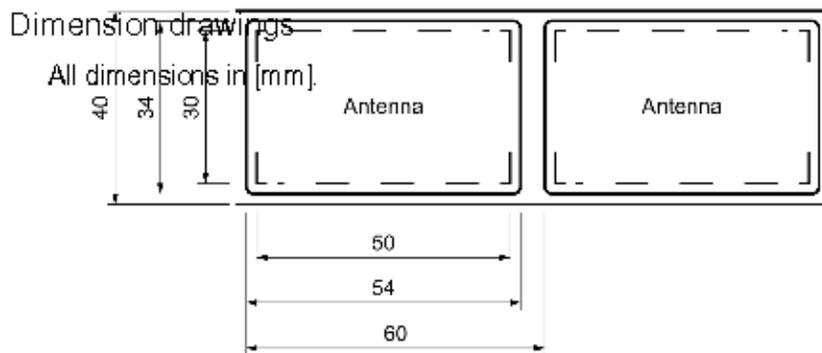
Dimension drawing SIMATIC RF630L (6GT2810-2AB01-0AX1)
